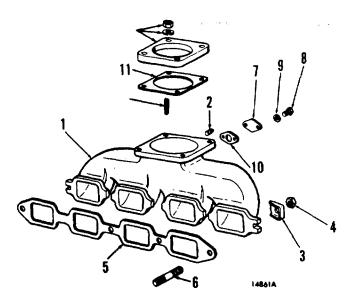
EXHAUST MANIFOLD (CENTER OUTLET)
